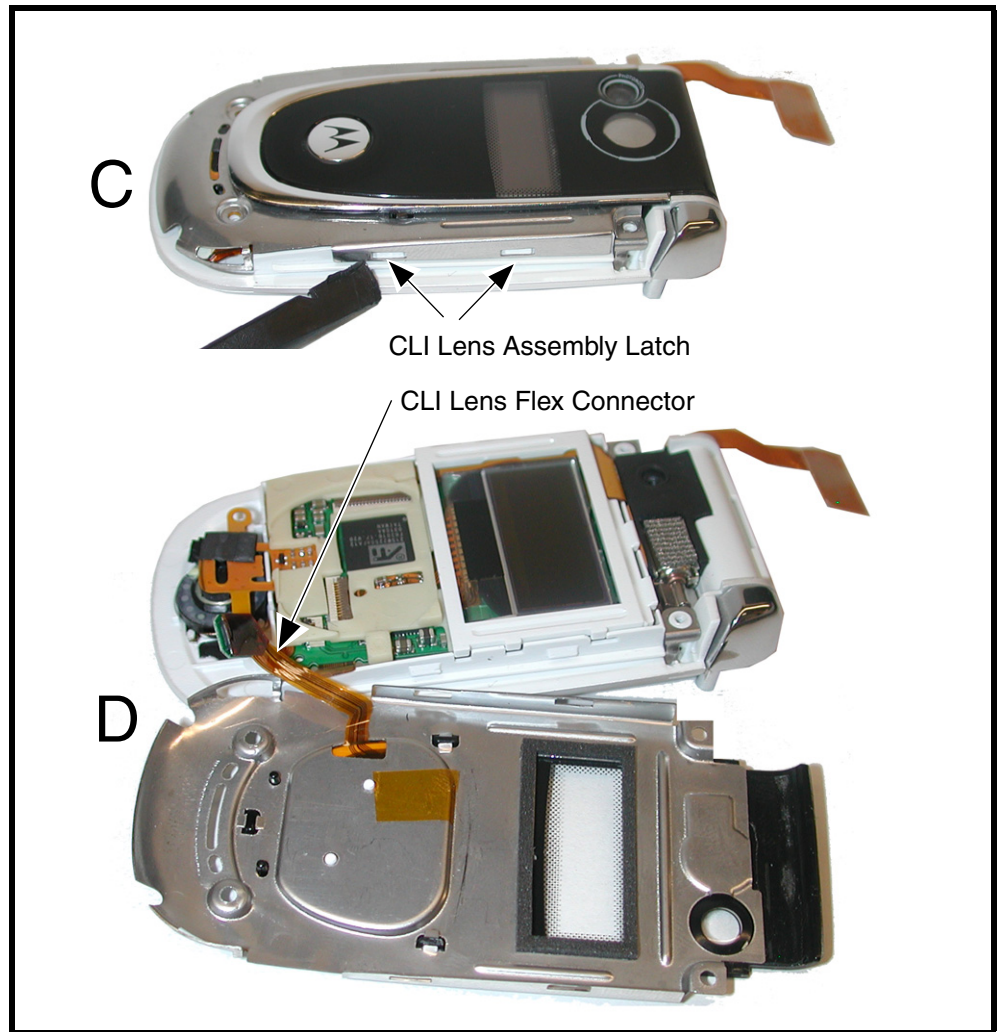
Removing the Flip CLI Lens Assembly Part 2
